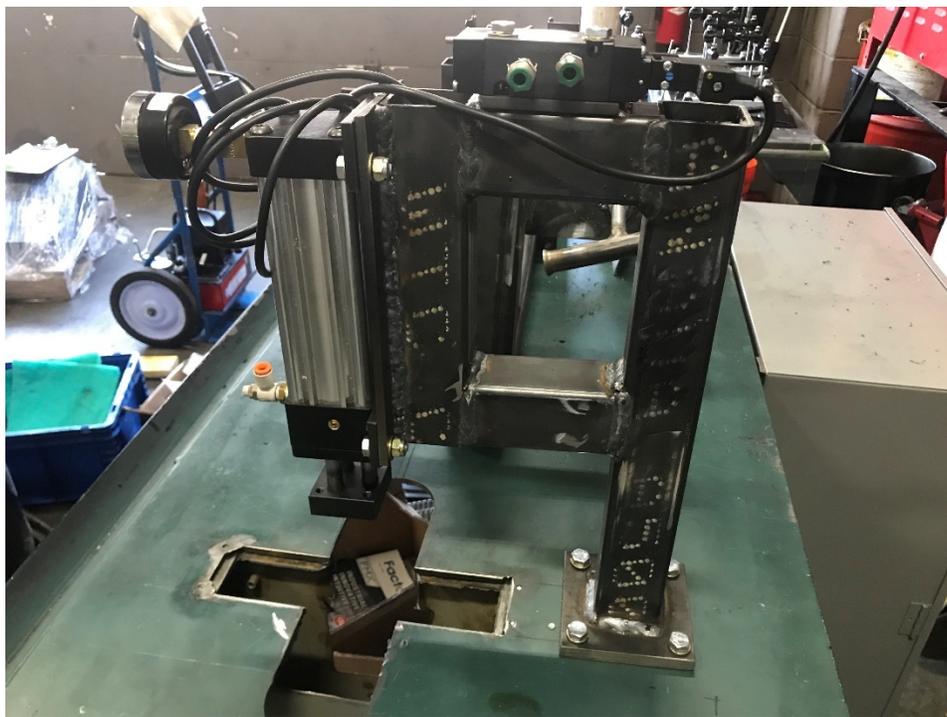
Overview of Top of the Table, with the pneumatic cylinder and stand for the cutting system.
